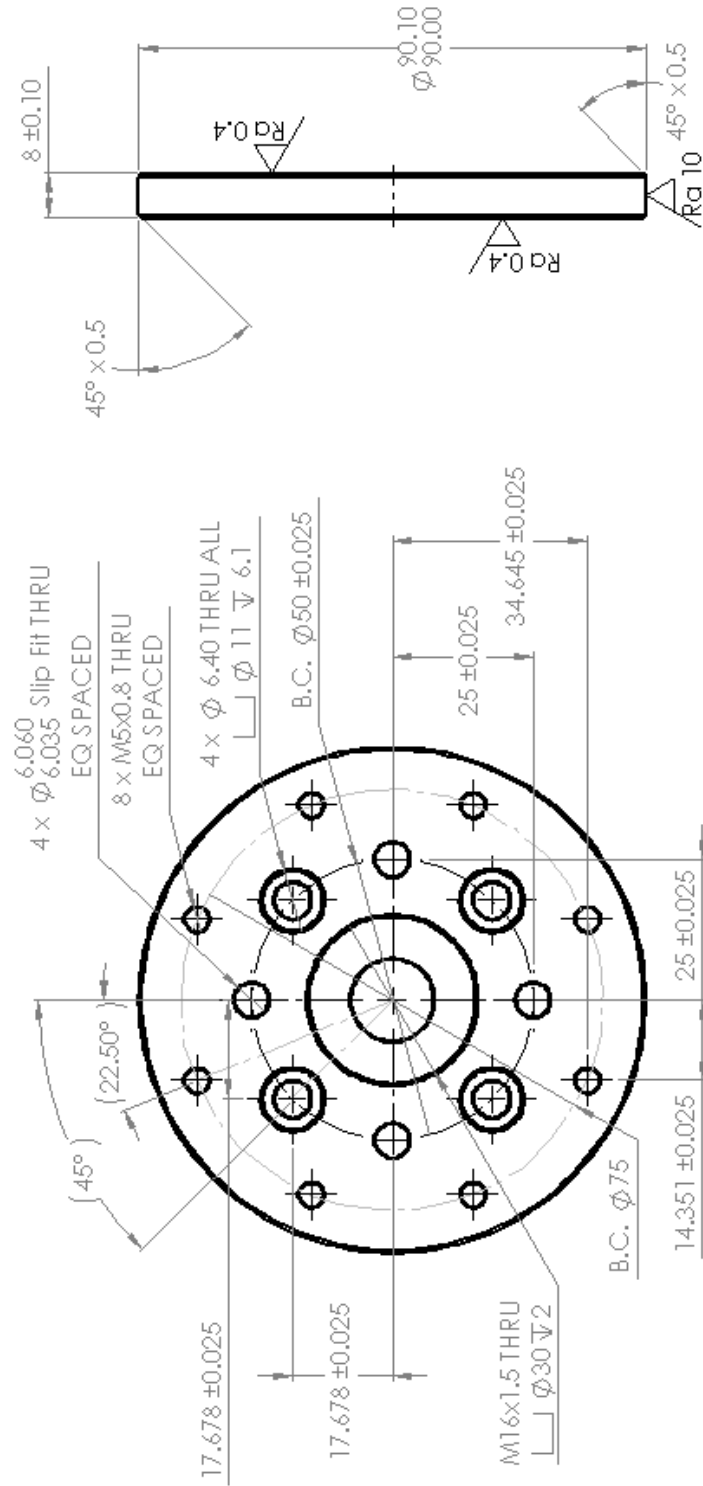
Force/Torque sensor to tool holder connection plate. Material Al7060
